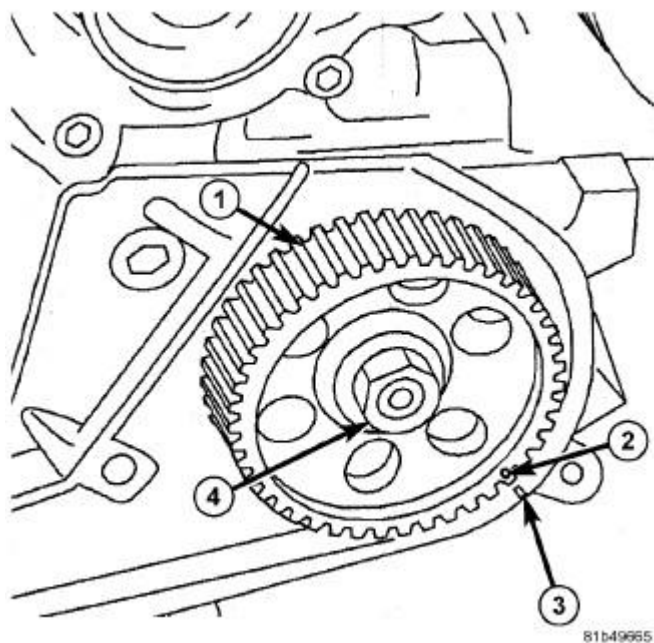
FUEL INJECTION PUMP TIMING MARKS
